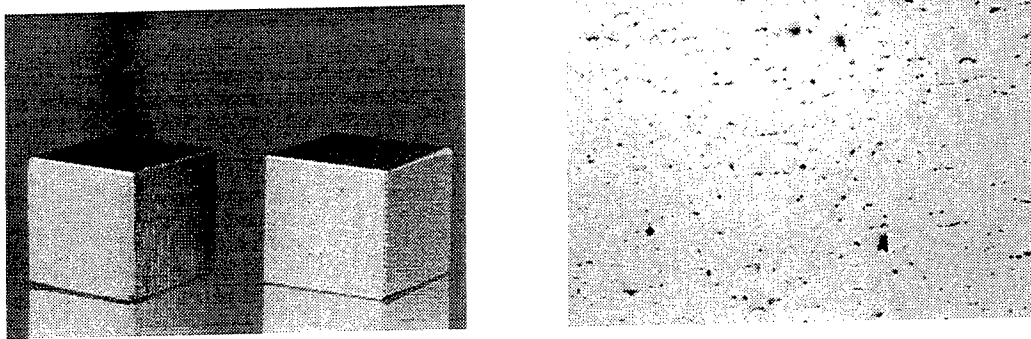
Stainless steel test parts ($10 \times 10 \times 10 \text{ mm}^3$) and cross-sectional view
